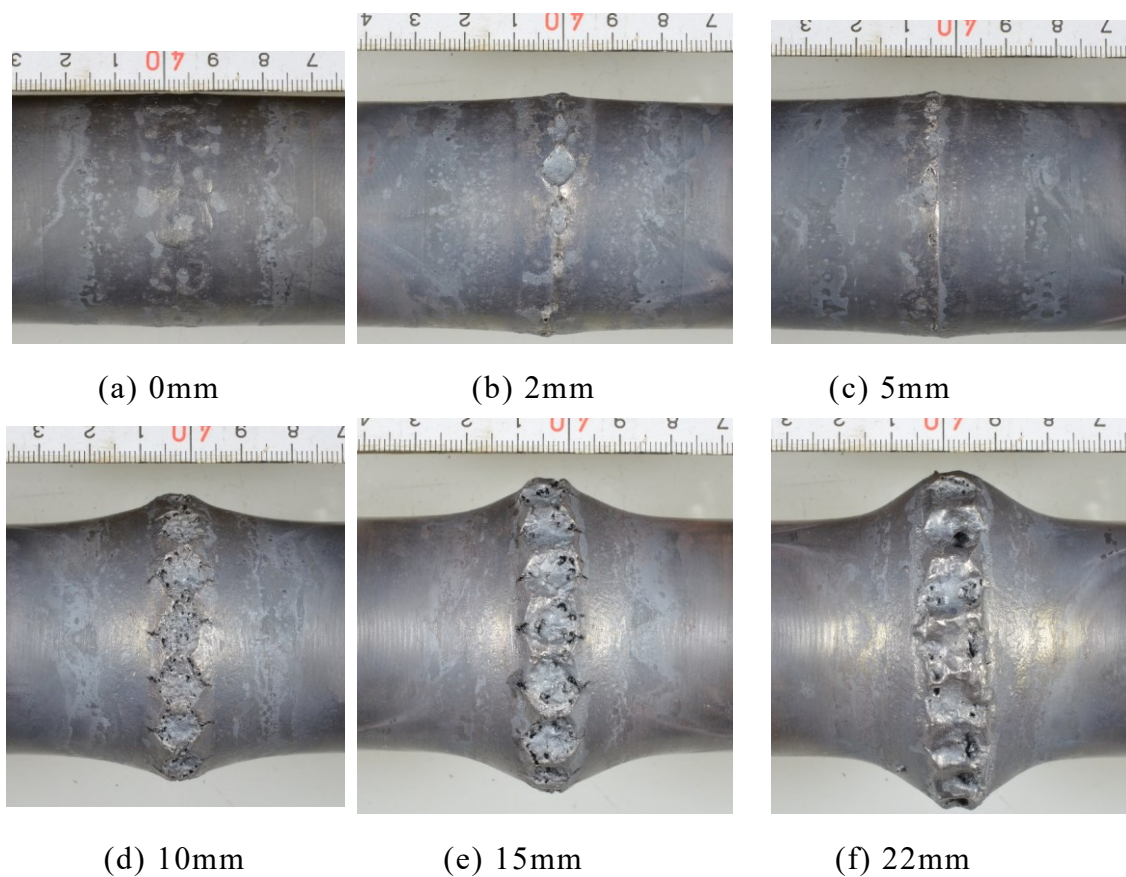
Appearances of gas pressure weld specimens
